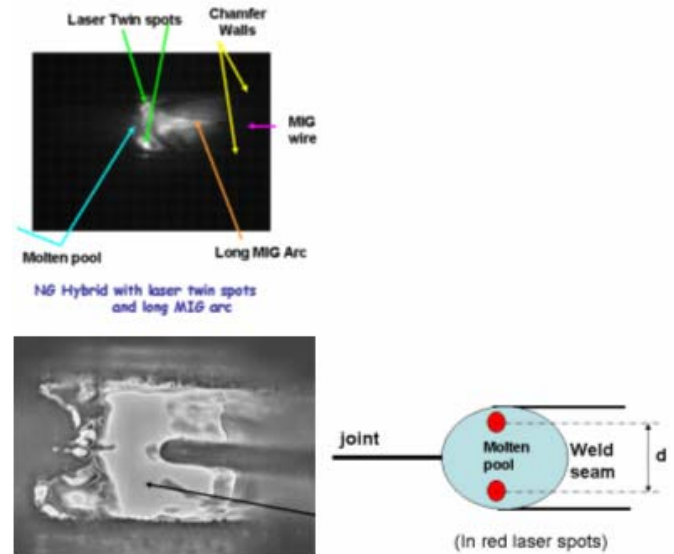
Hybrid with 2 laser spots combined coaxial vision technique
